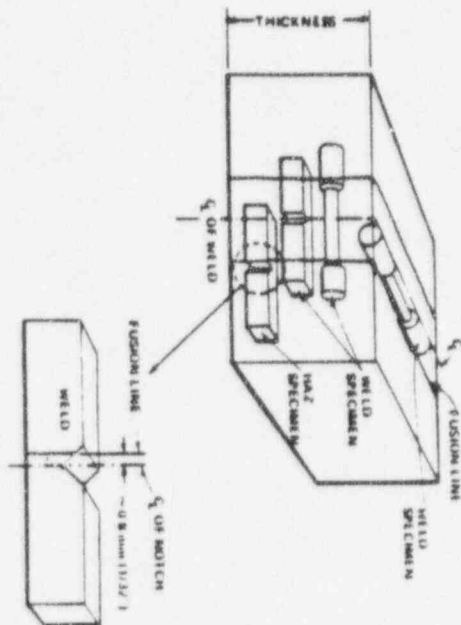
Location of Test Specimens Within Weld and Heat-Affected Zone (HAZ) Test Material
